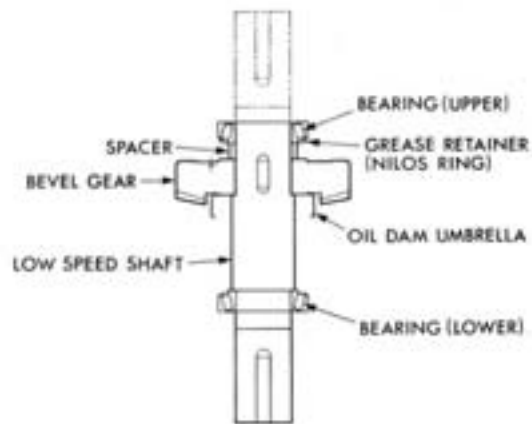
LOW SPEED (BEVEL GEAR) SHAFT ASSEMBLY
